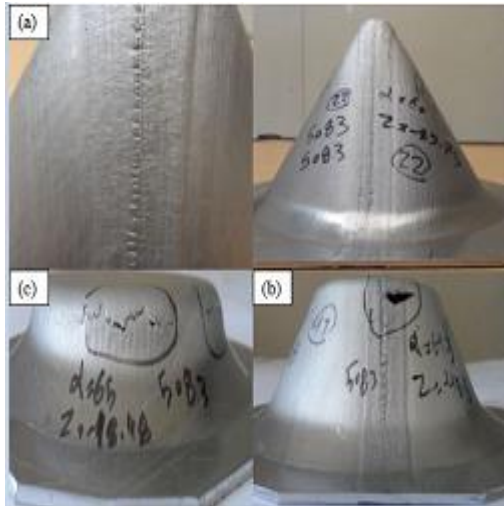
Incremental forming of friction stir welded 5083 aluminum sheets. (a) 60°, (b) 61.3°, (c) 65°
